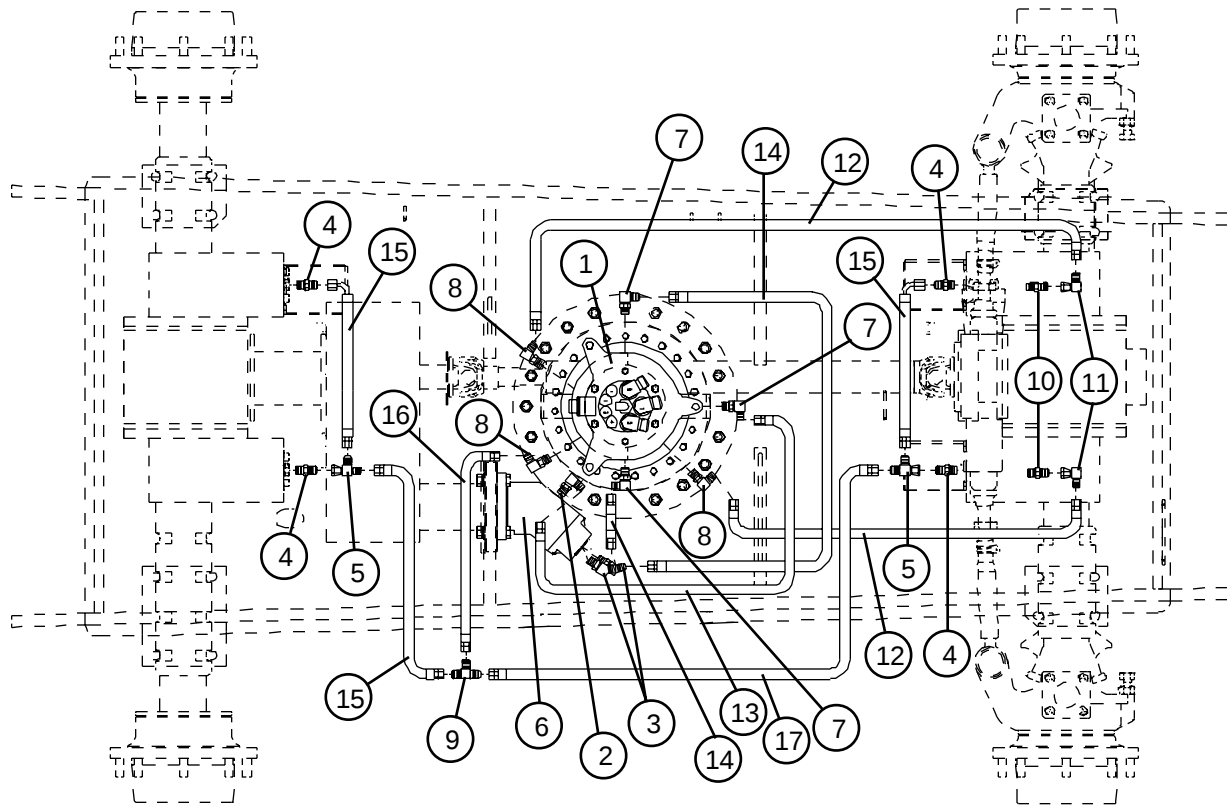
BASE ASSEMBLY HYDRAULIC CONNECTIONS (Standard 4x2)
